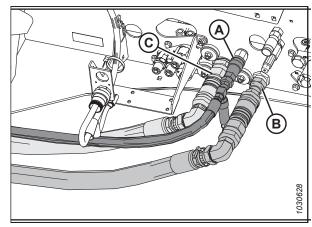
Header Drive Hydraulics – All M1 Configurations using Quick Couplers
